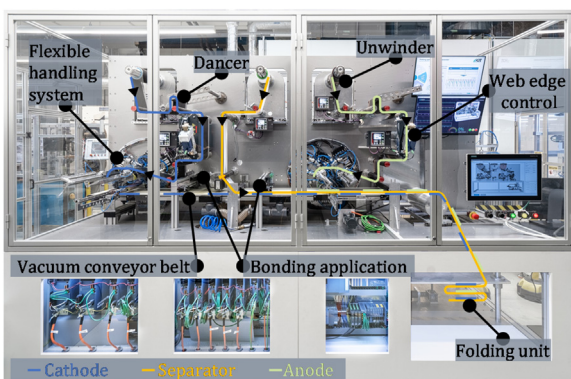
New machine concept for a flexible cell stack assembly [117,118]. Image source: KIT, Bramschiepe.
